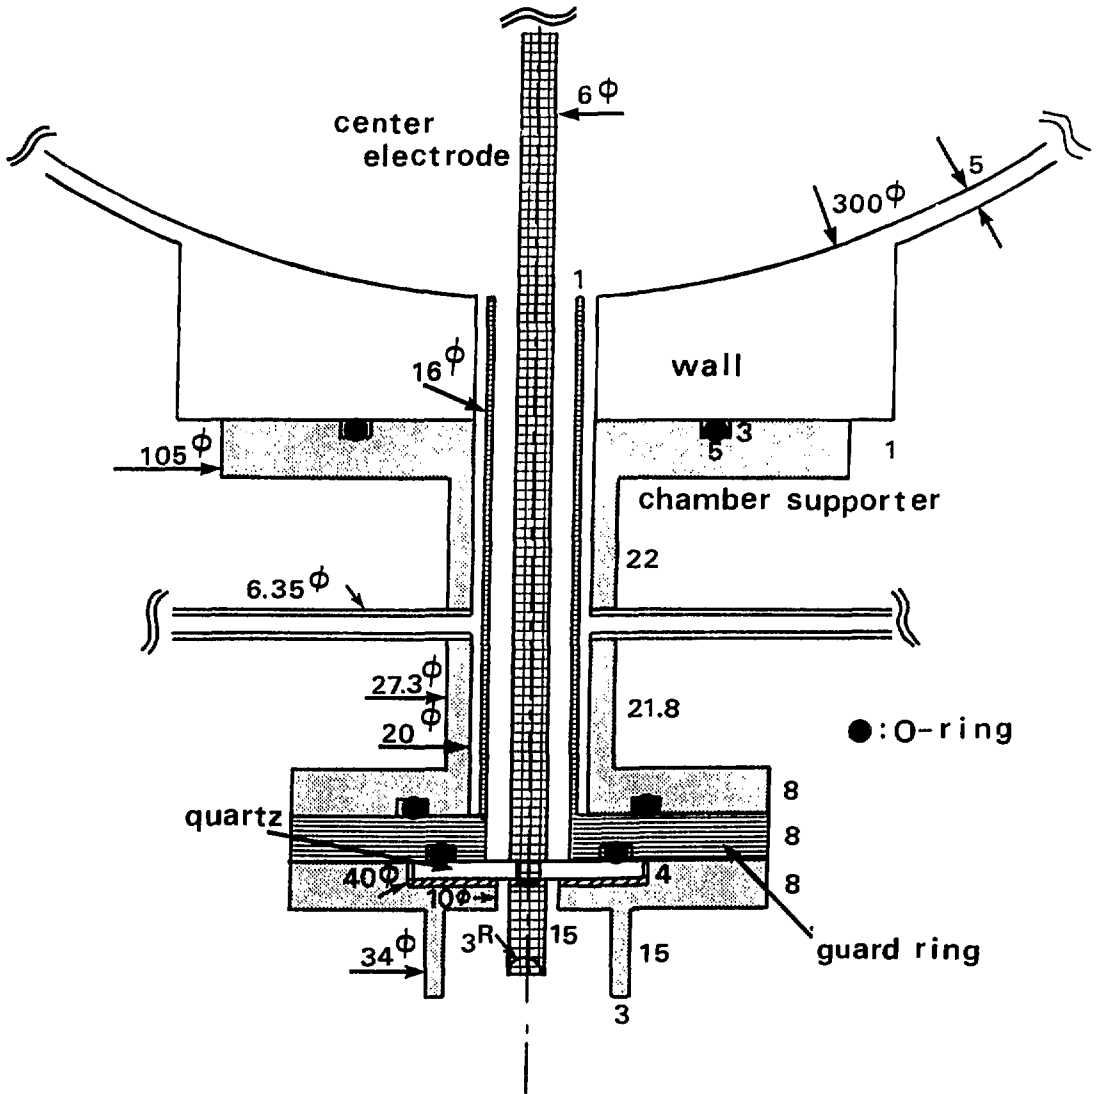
Detail cross-sectional view of the electrode assembly of the 14l spherical ionization chamber.
